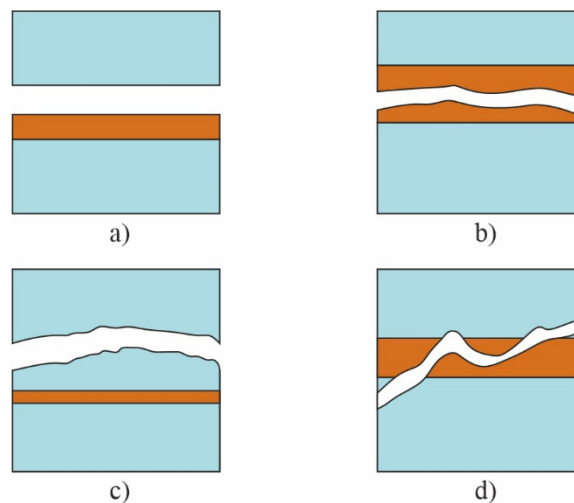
Methods of separation of glued surfaces: a) Adhesive failure; b) Cohesive failure (through the adhesive layer); c) Cohesive failure (through the substrate); d) Mixed failure.
